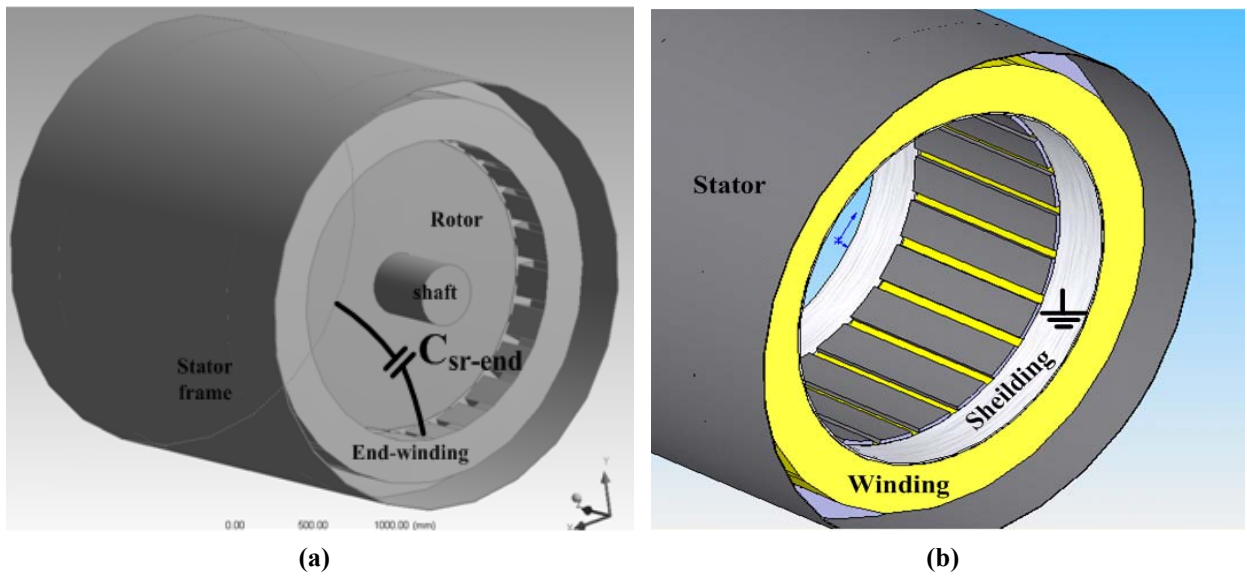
view of (a) machine structure with end-winding (b) shielded end winding
